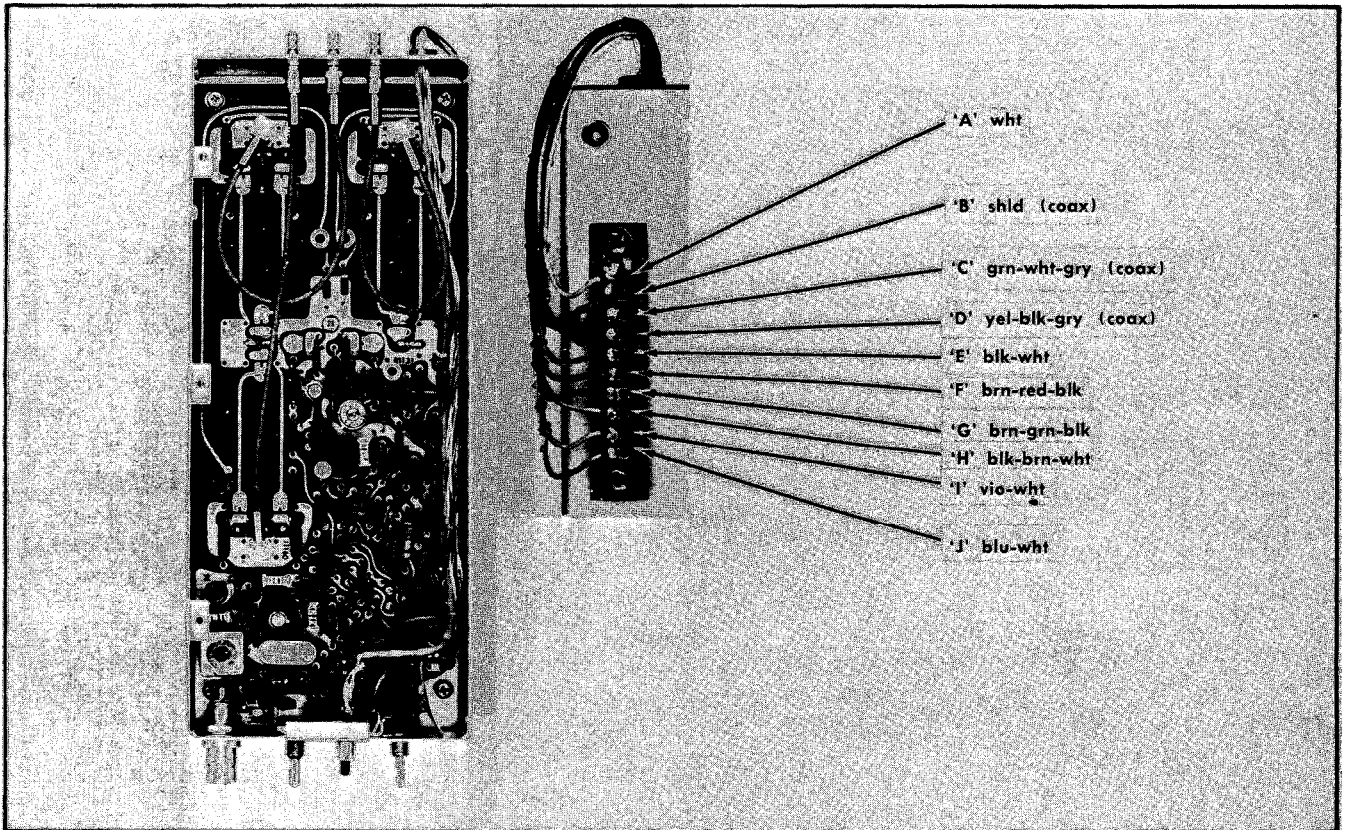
Phase lock assembly and wiring color code to the pin connector.
